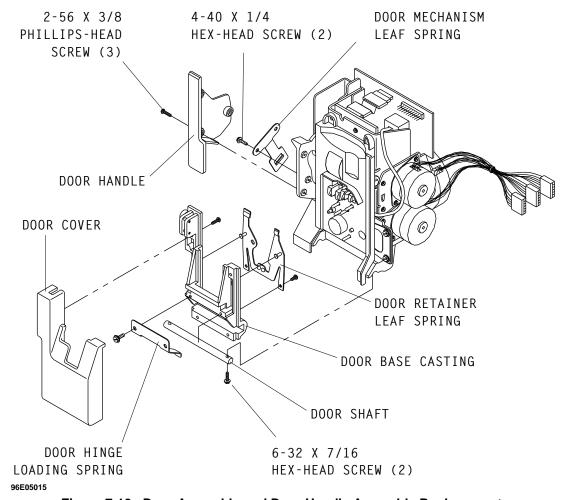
Door Assembly and Door Handle Assembly Replacement
